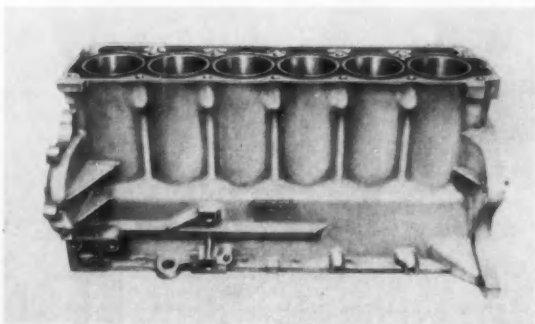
Left side view of Chrysler die-cast aluminum cylinder block.
